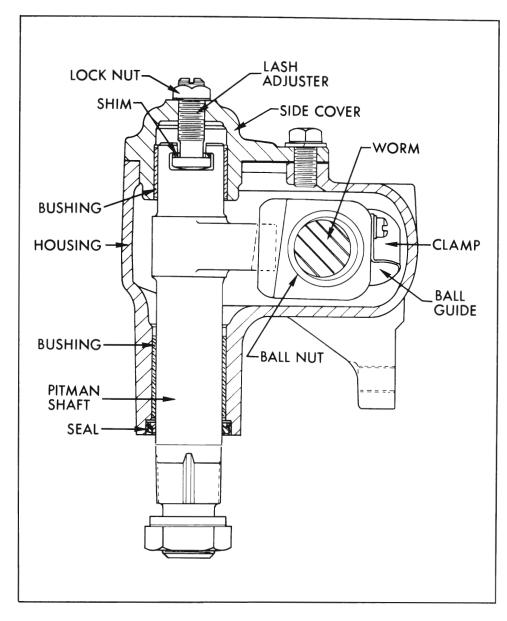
Steering Gear Pitman Shaft and Ball Nut
